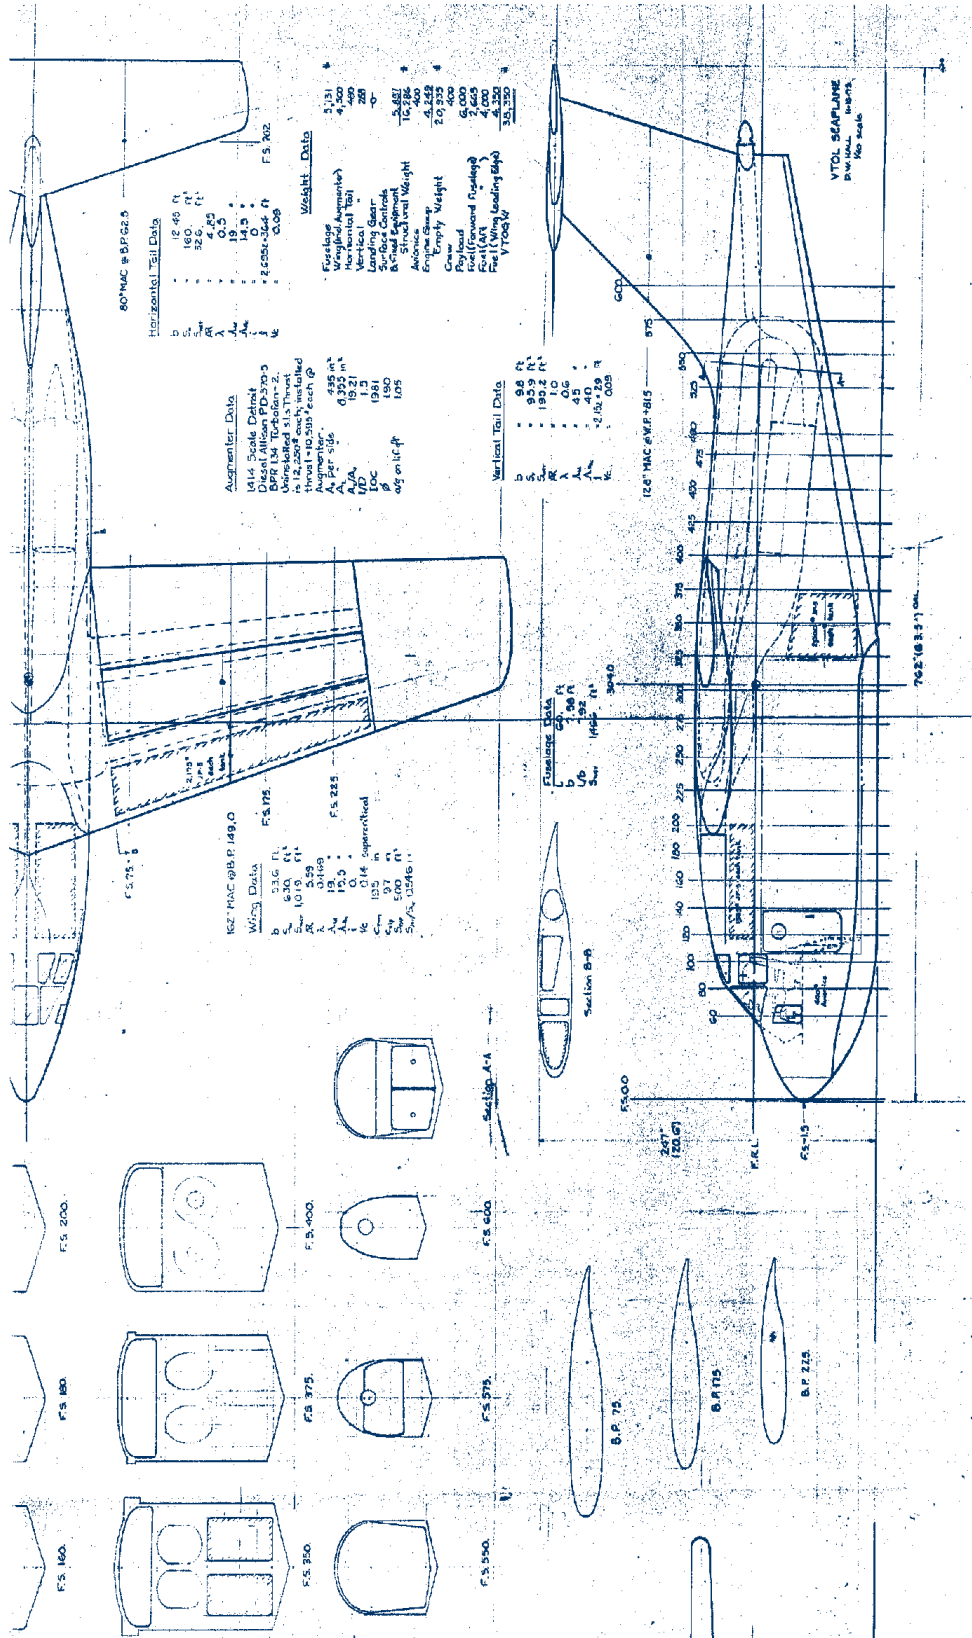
This April, 1973 Configuration Drawing is Typical of First Layouts.
